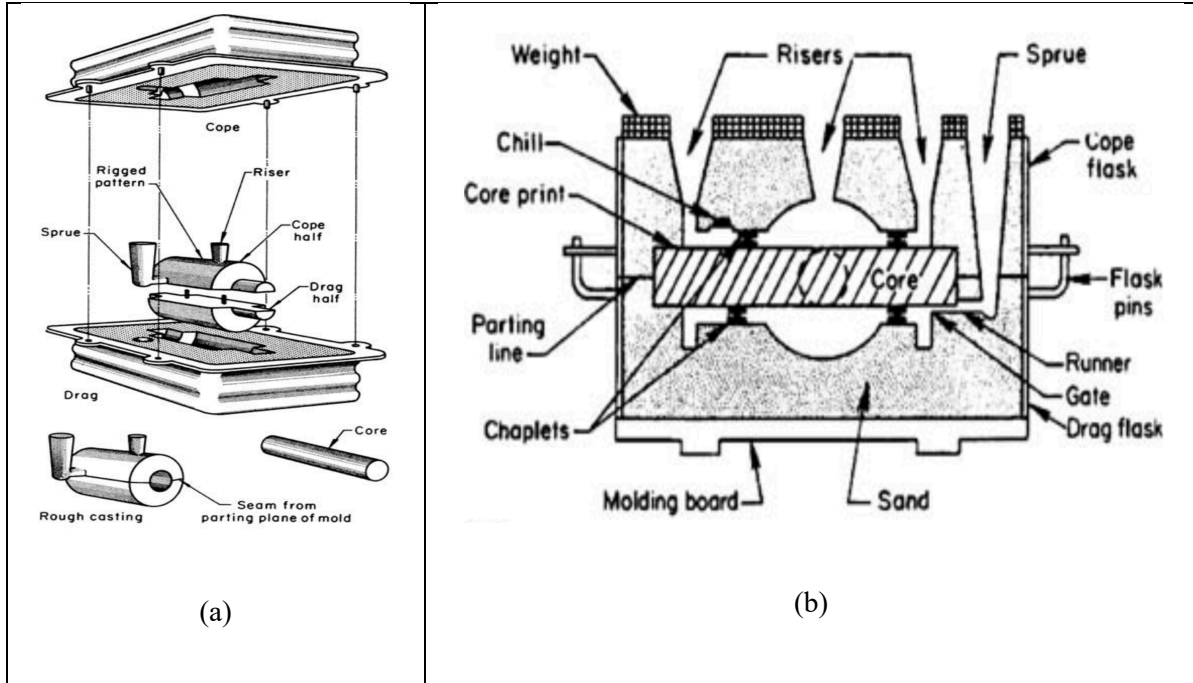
Sand Casting. (a) Exploded view of sand mold components. The top part is called the cope and the bottom part is called the drag. A core is used to select areas where molten metal is not to flow, which helps minimize post processing. (b) Assembled Cross Sectional View. A cross sectional view is the best way to envision where the liquid metal enters the mold through the sprue, fills the cavity in desired areas, and exits the mold at the risers. This model represents a simple design that is easily produced using traditional preparation procedures of filling the cope and drag portions of the flask with sand, packing around a pattern up to the parting plane, removing the pattern and assembling the flask halves. AM assisted sand casting will be discussed later.
